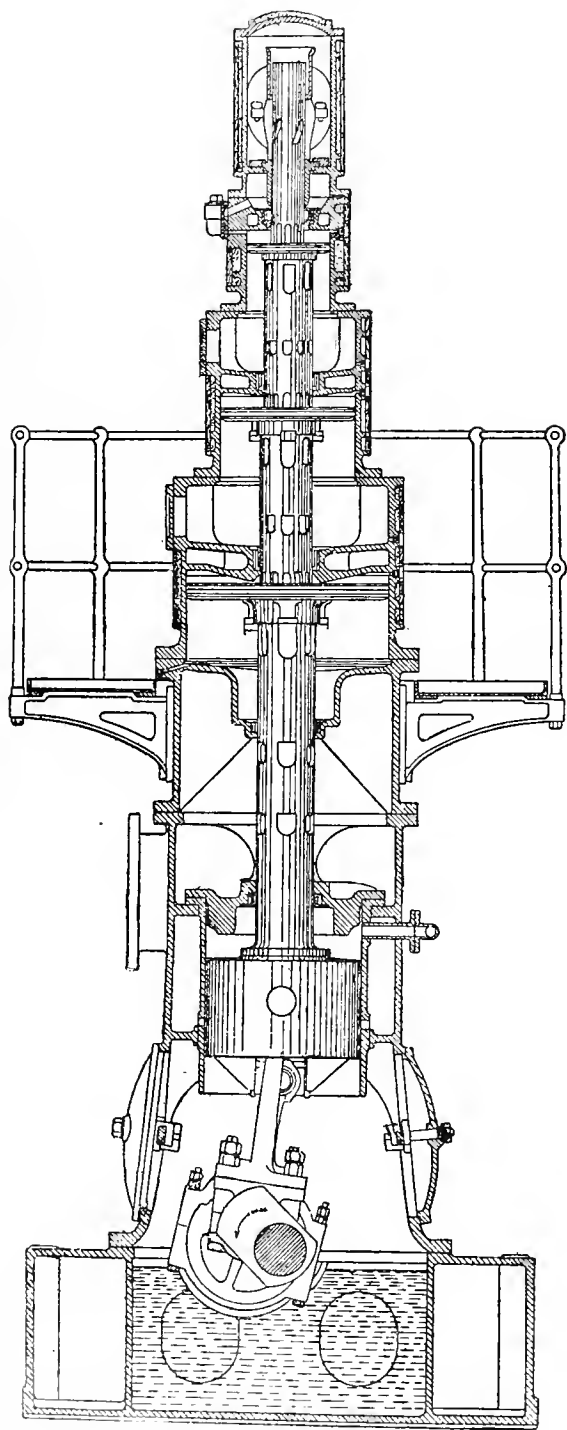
OUTLINE SECTION OF A TRIPLE EXPANSION CENTRAL VALVE ENGINE.
